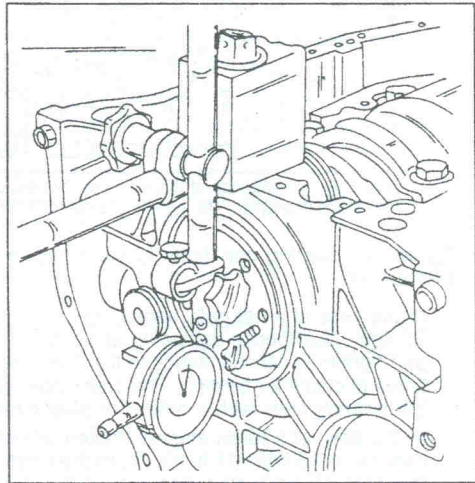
Checking the crankshaft end float with a dial gauge. The dial gauge needle is resting against the crankshaft flange.
